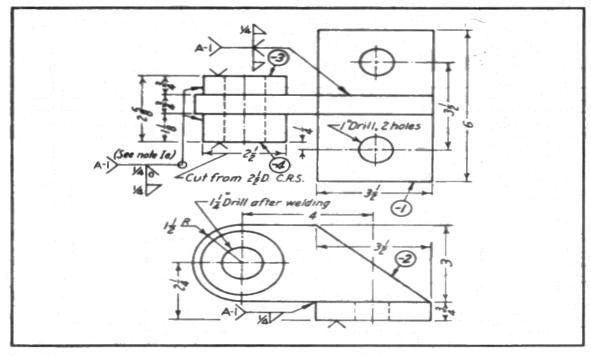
Detail drawing of a welded part. Compare with cast part.
